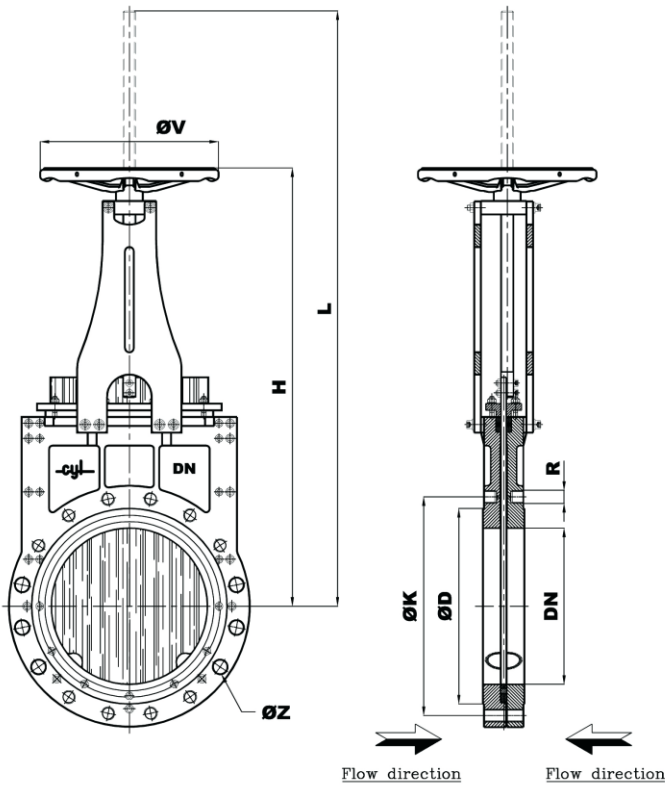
KGV XD-HP series rising stem with handwheel & gearbox
